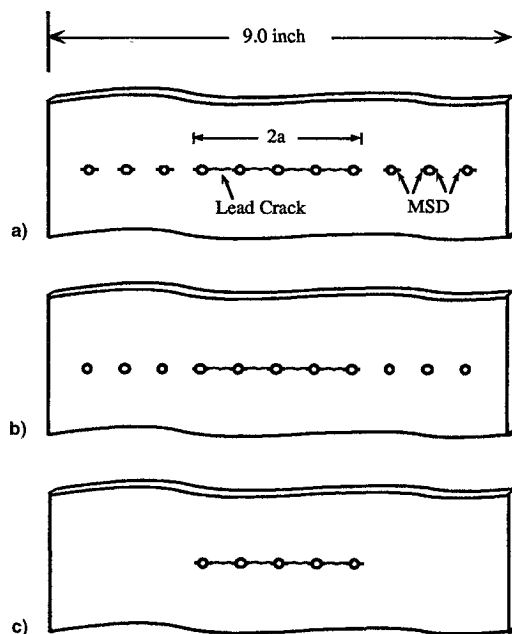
Schematic representation of the three types of RS specimens: a) type 1 specimen with lead crack and MSD at all holes, b) type 2 specimen with lead crack and holes without MSD, and c) type 3 specimen with lead crack only.
